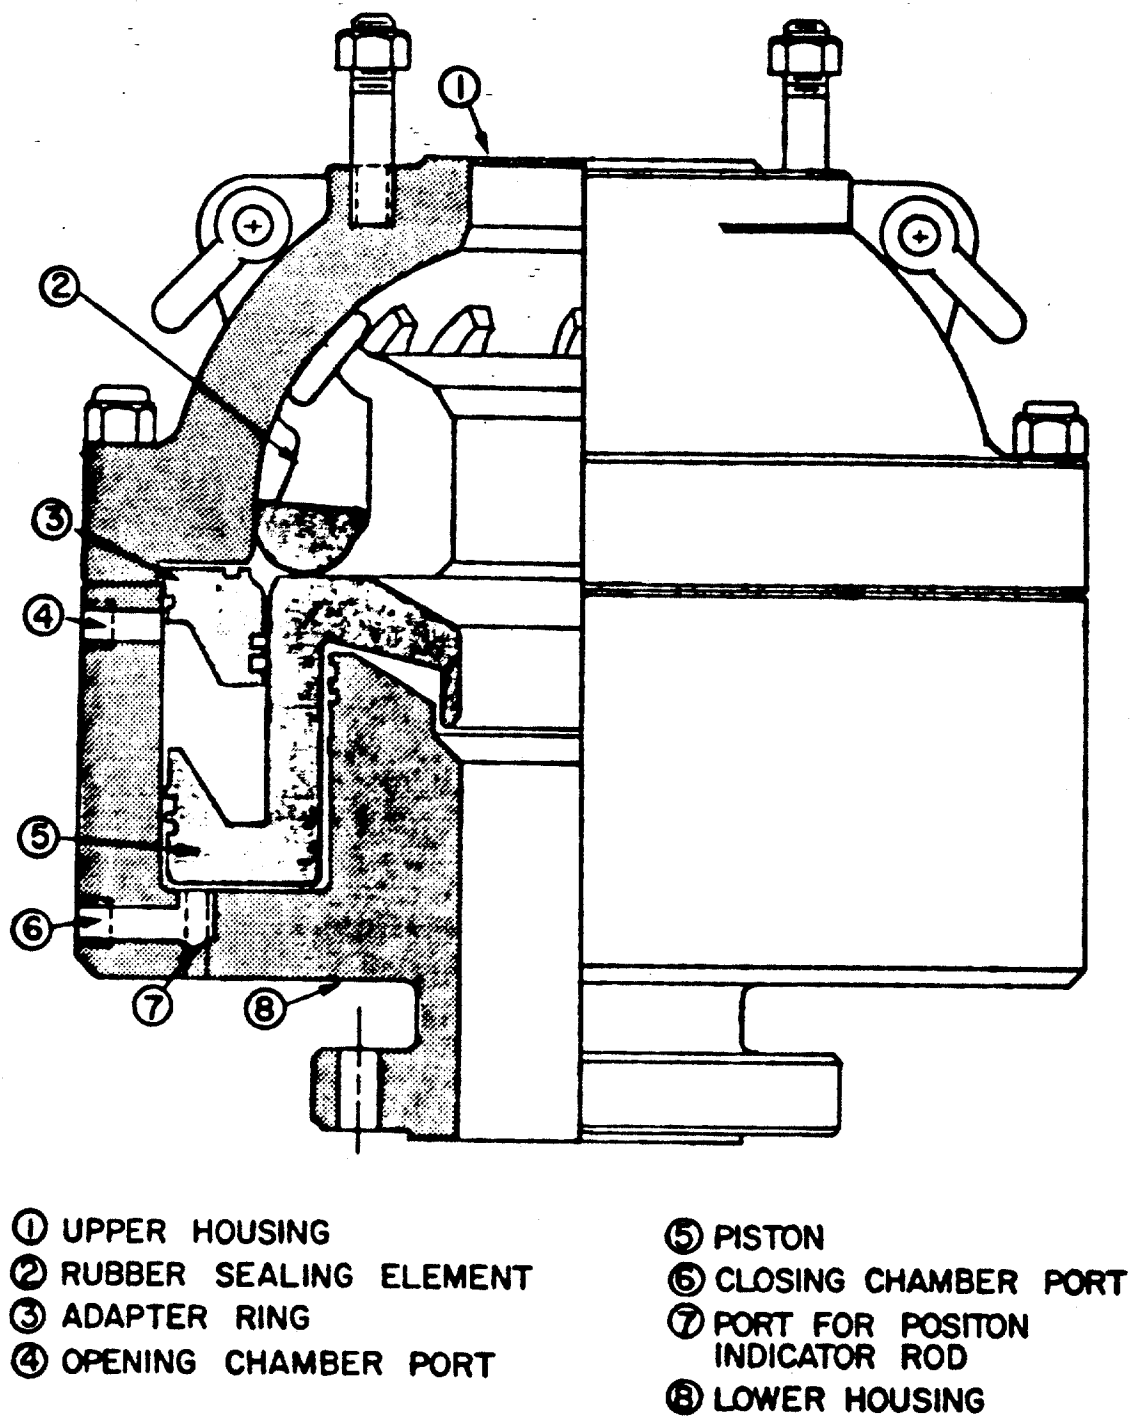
Cutaway View of 7-¹/₁₆ in. Shaffer Spherical Blowout Preventer
